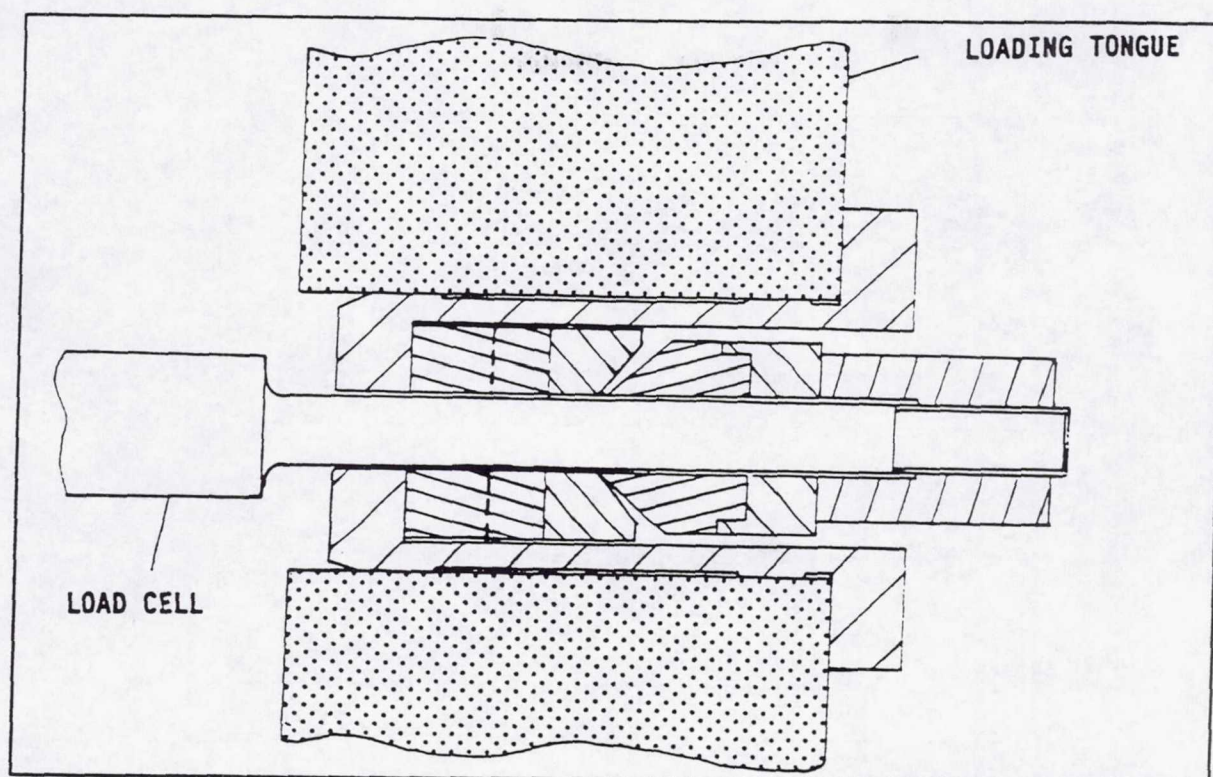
Normal Force Loading Arrangement Using Knife-Edge Assembly.
